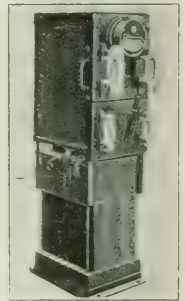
A.C. WELDING TRANSFORMER.
